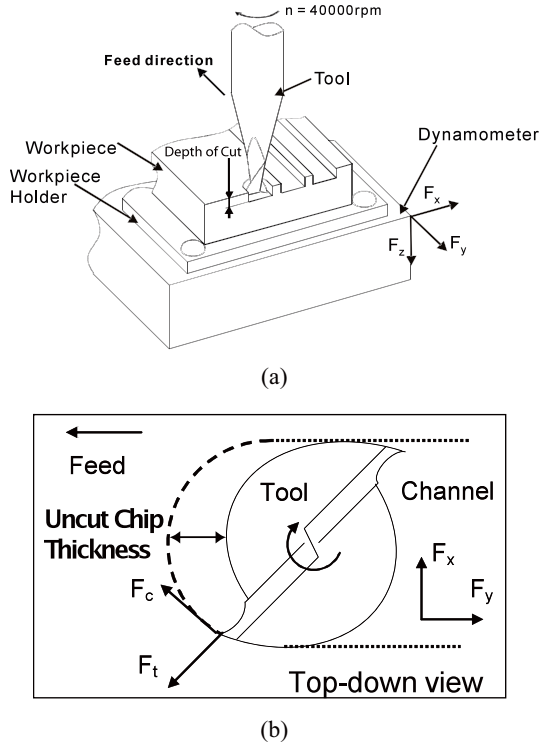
Schematic of micro end milling: (a) 3D view of experimental setup, (b) end view of the cutting process.
